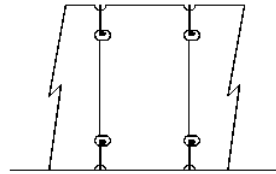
Block assembly methods 3-2c and 3-2d [2], [30]
